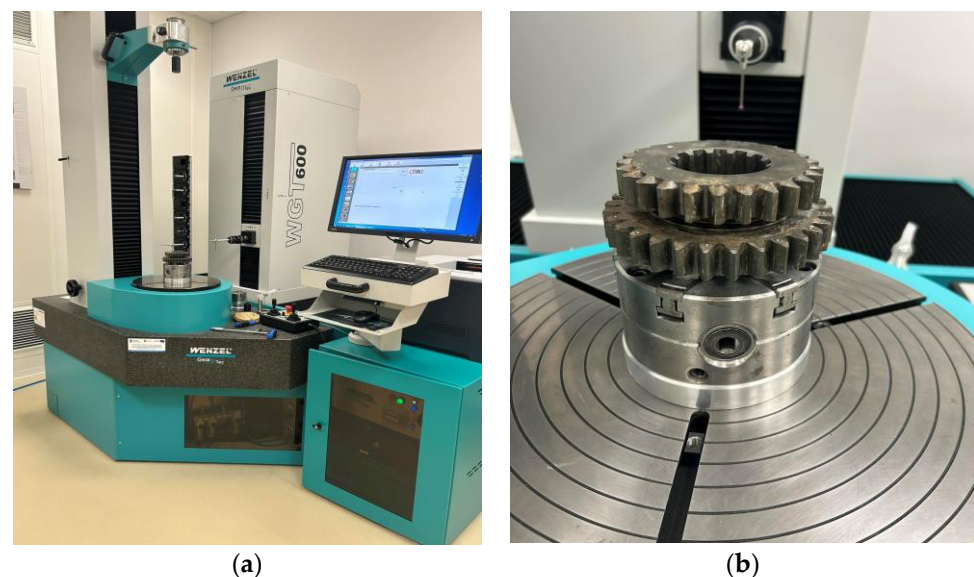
Measuring machine: (a) test stand, (b) with a gear wheel prepared for contact measurements.
